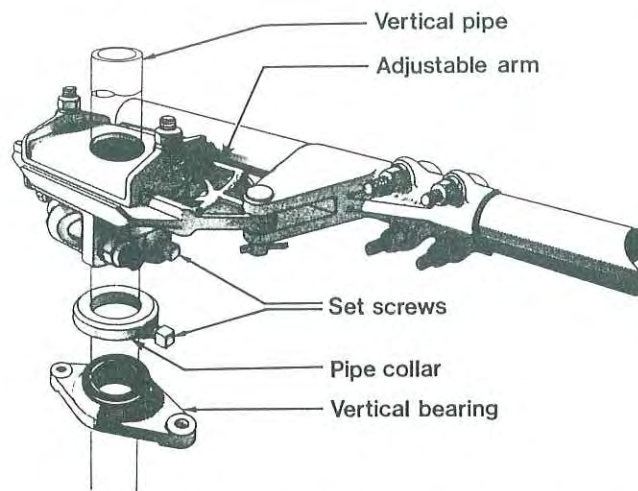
Adjustable arm assembly. Pipe collar must support full weight of pipe.
